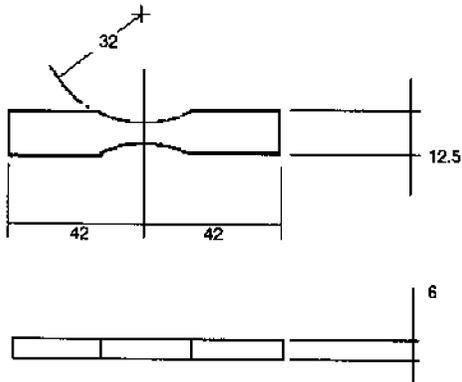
Specimen dimensions of the bar used for tensile and flexural fatigue testing in mm.
